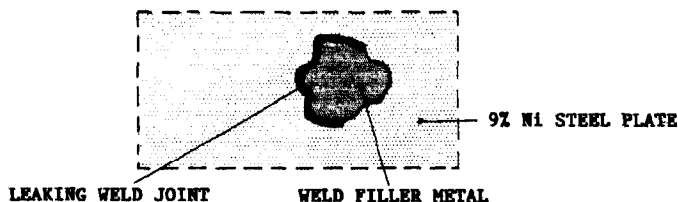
Inside-tank view of a weld repair leakage line.
